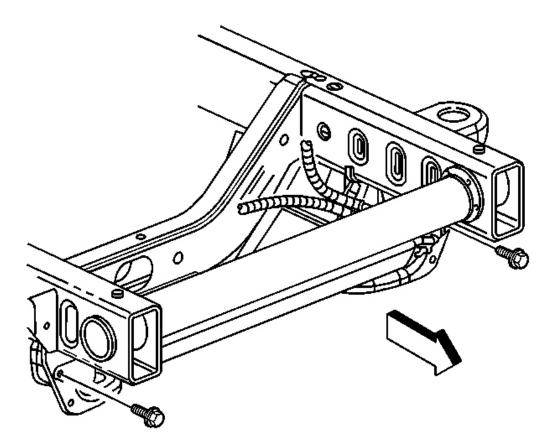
View Of Power Steering Cooler Mounting Bolts Courtesy of GENERAL MOTORS CORP.
